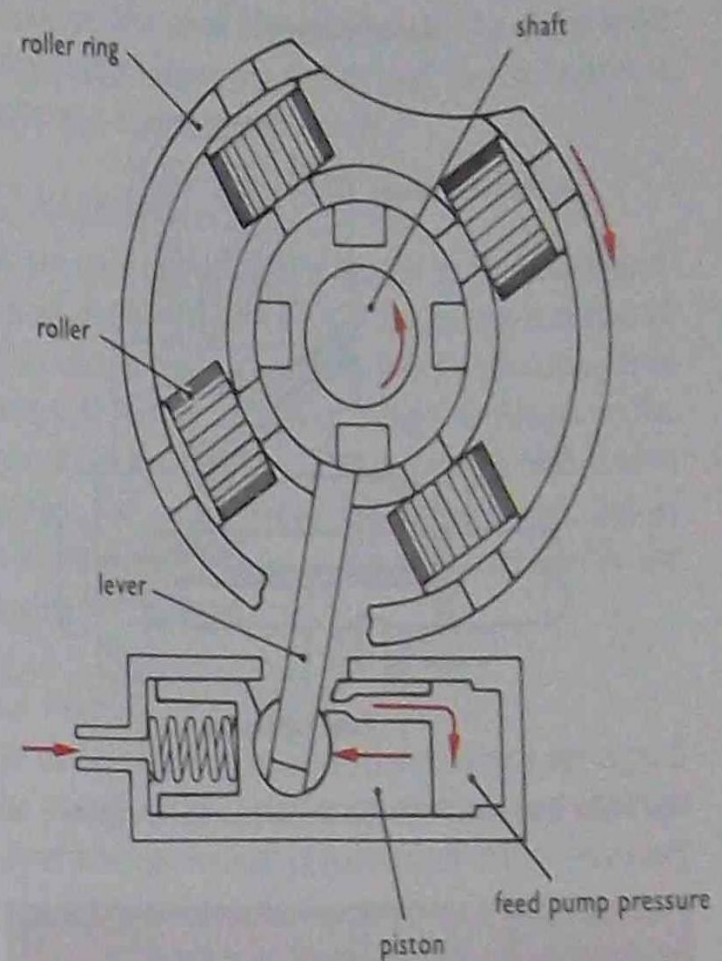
Timing device used on a distributor injection pump ZEXEL
